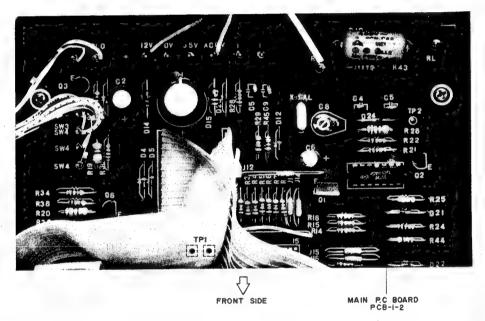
Main P.C Board PCB-1-2 (DT-200)
